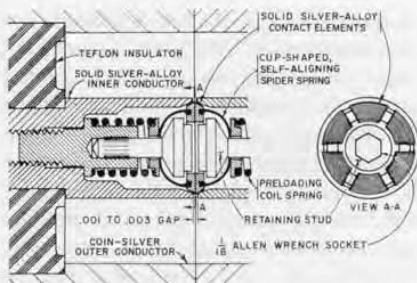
Cross-section view of the connector showing contact surfaces of two mated inner conductors.
